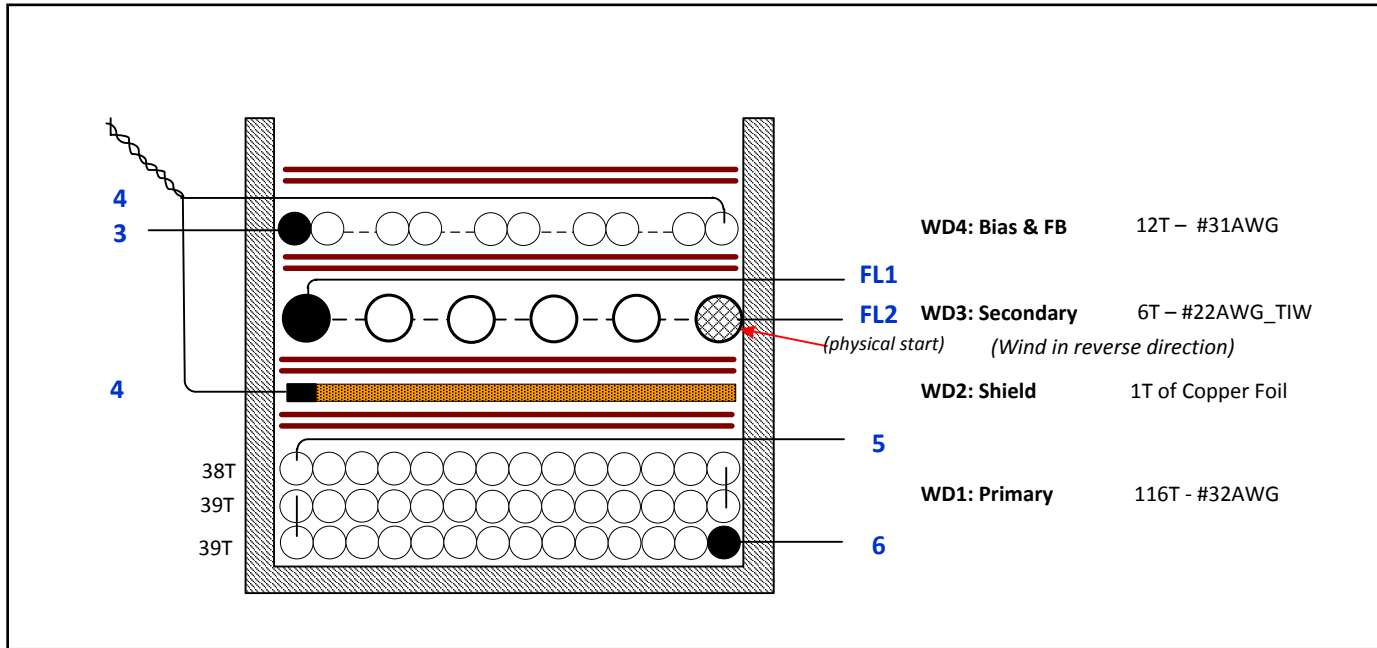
Typical Mechanical Construction of LinkSwitch-3 Transformer with Copper Foil Shield.
